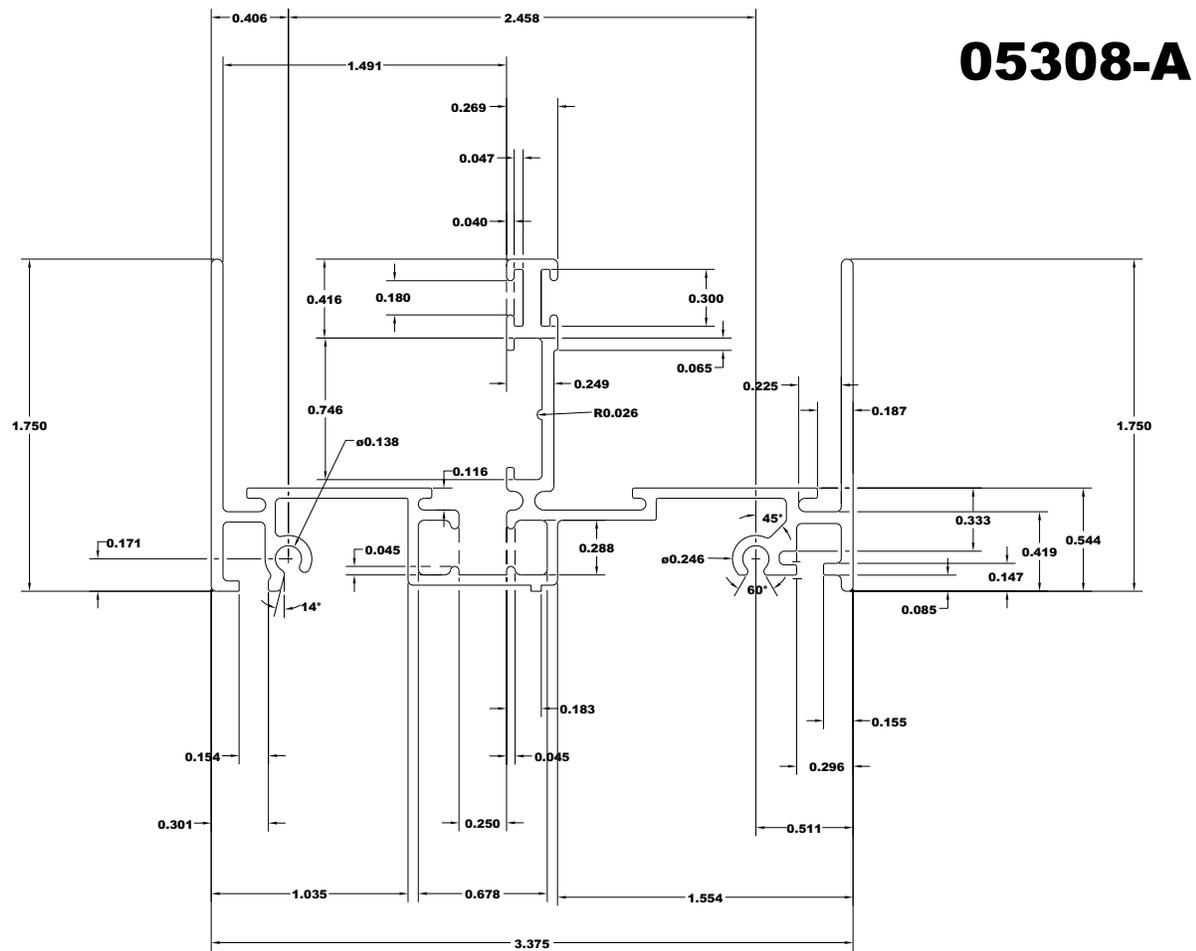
Head Drawing for Horizontal Aluminum Slider.
